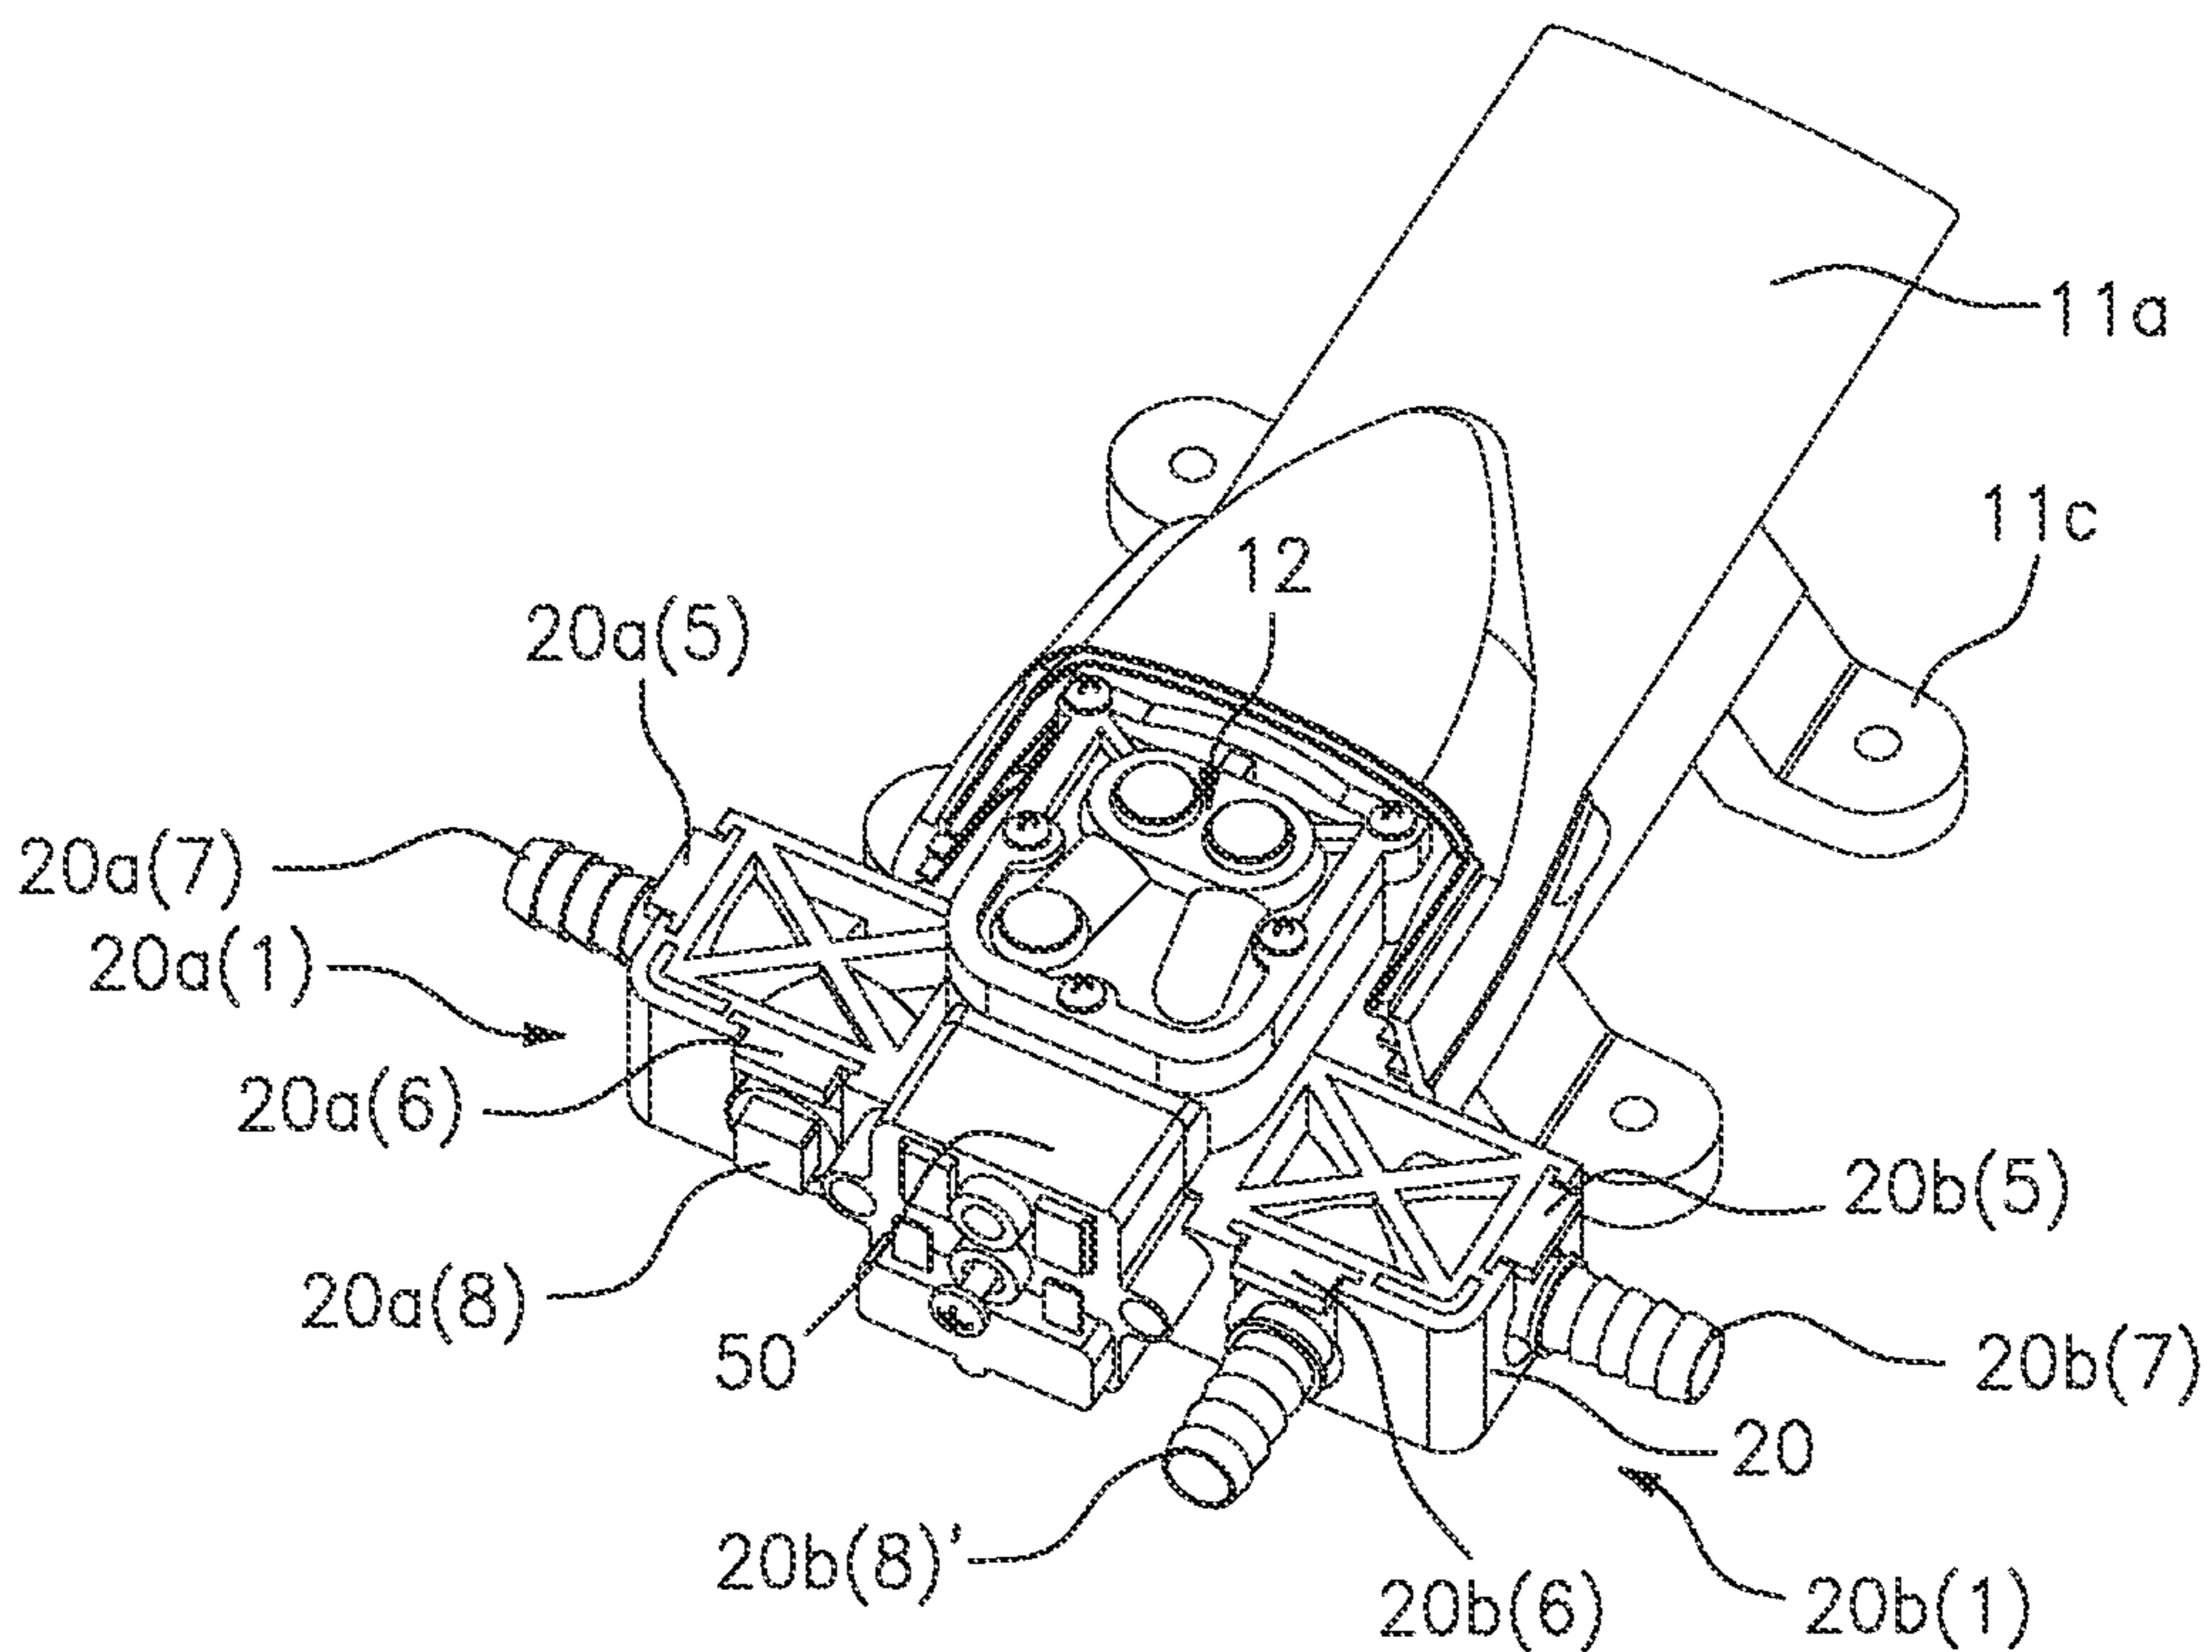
C: Pump Assembly showing either dual inlet/outlet port fitting connection
